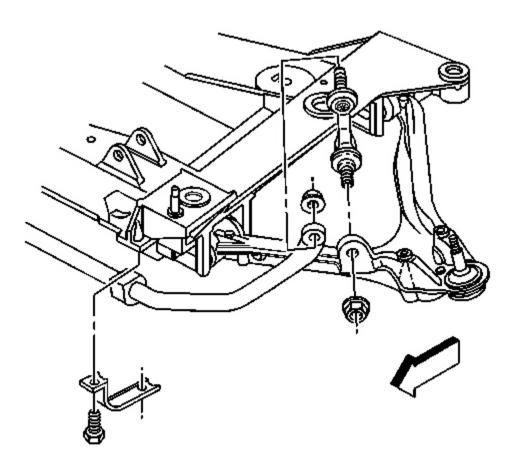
Stabilizer Shaft Insulator Clamps, Stabilizer Shaft Link & Nuts Courtesy of GENERAL MOTORS CORP.
